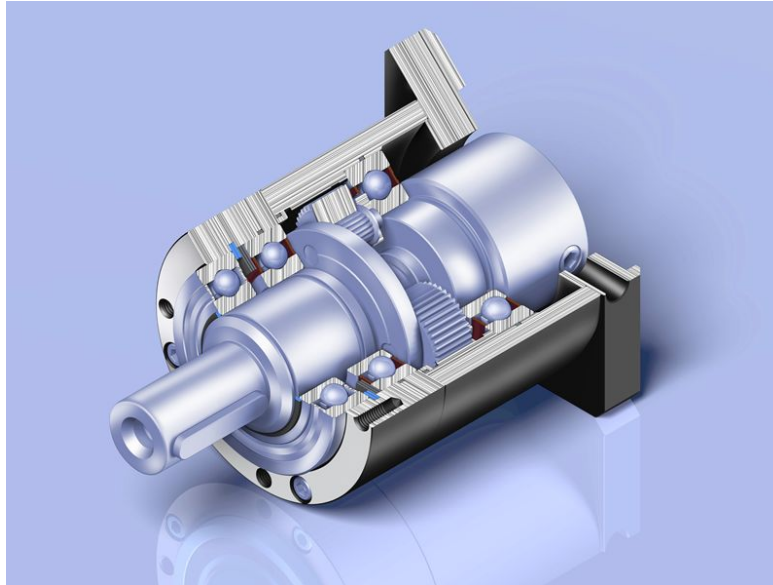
Planetary Gear Reducer Section View from www.shimpodrives.com/able.html.
